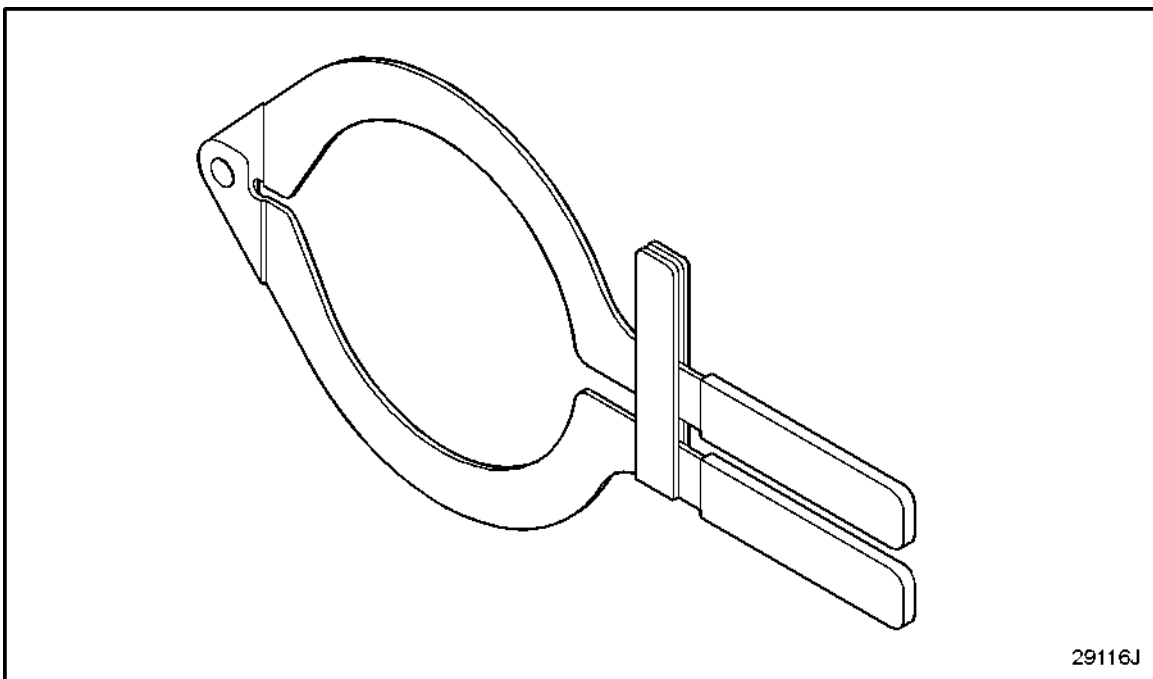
Piston Seal Ring Compressor, J 24421
